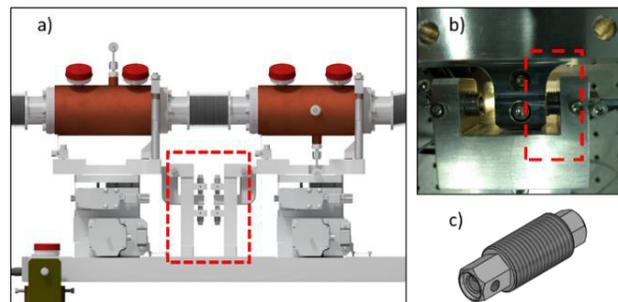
a) design for the LS system with 4 sensors per slit (2 vertical and 2 horizontal); b) LS system assembled for validation test; c) sensor housing.
